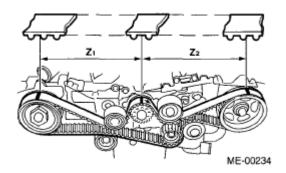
Identifying Drive Belt Length Courtesy of SUBARU OF AMERICA, INC.
